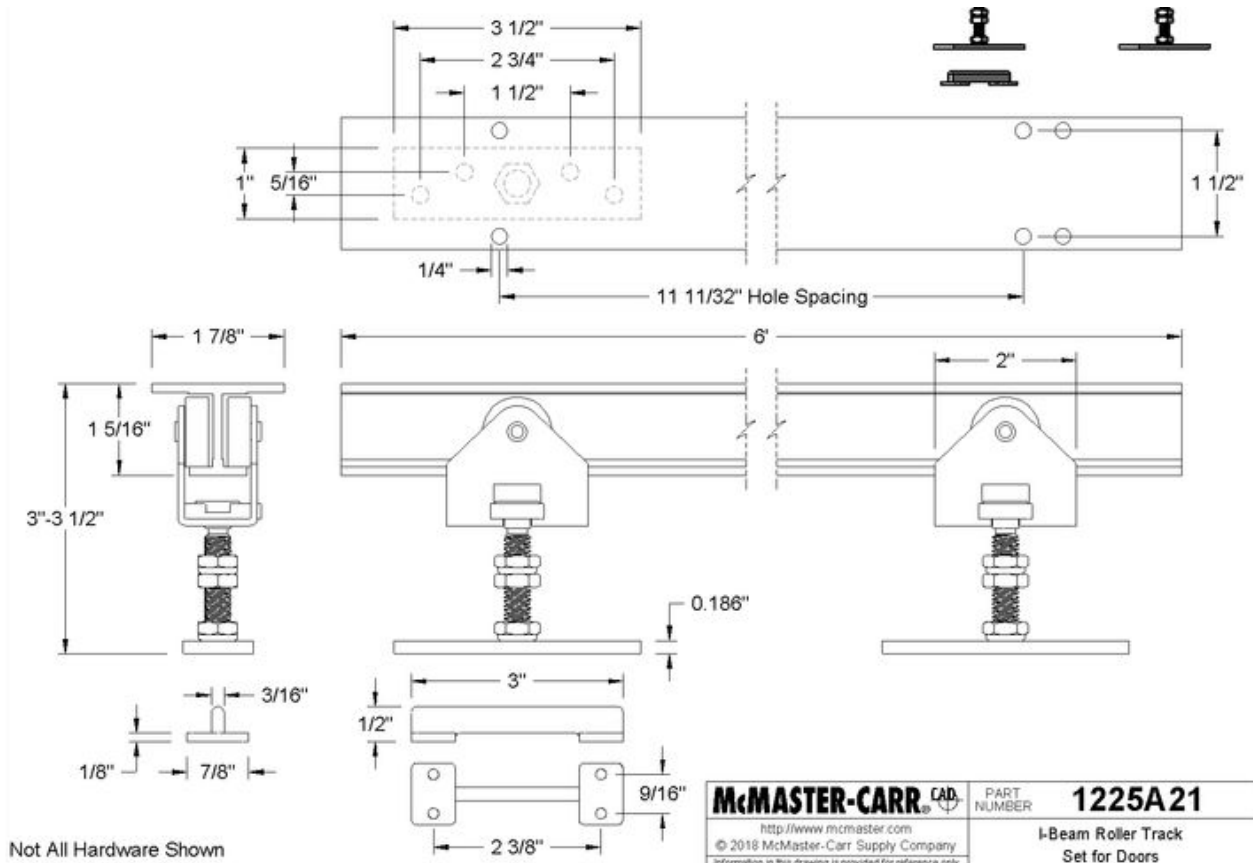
I-Beam Support Drawing Courtesy of McMaster-Carr
